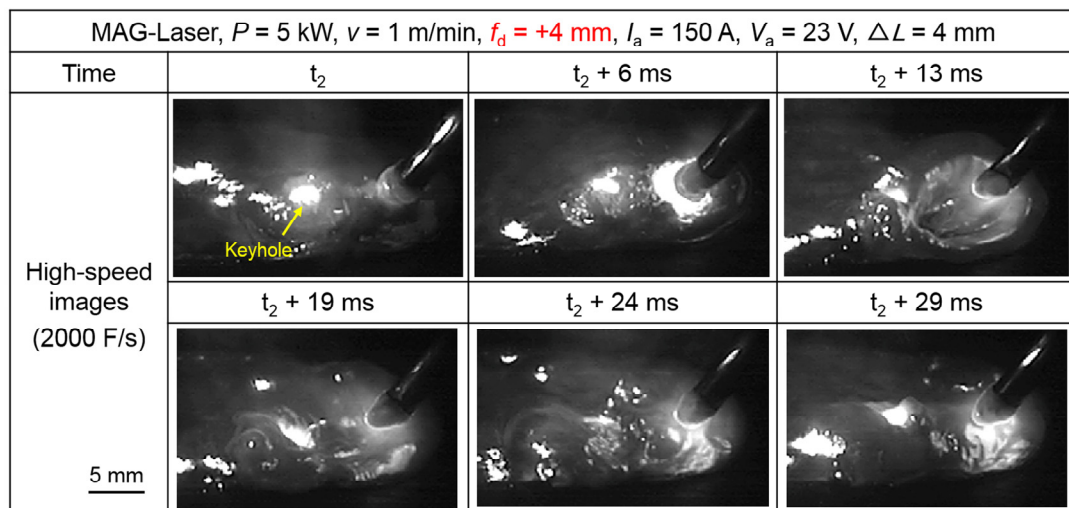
High-speed video observation results of molten surface behavior during hybrid welding at defocused distance of +4 mm.
